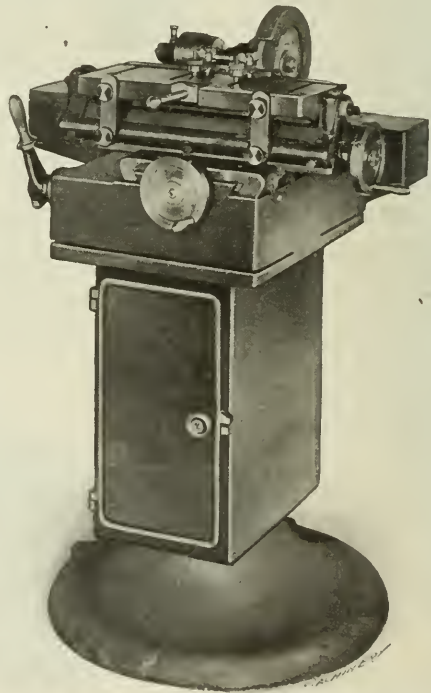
No. 1 Universal Gage Grinder built by Steel Products Engineering Co.
